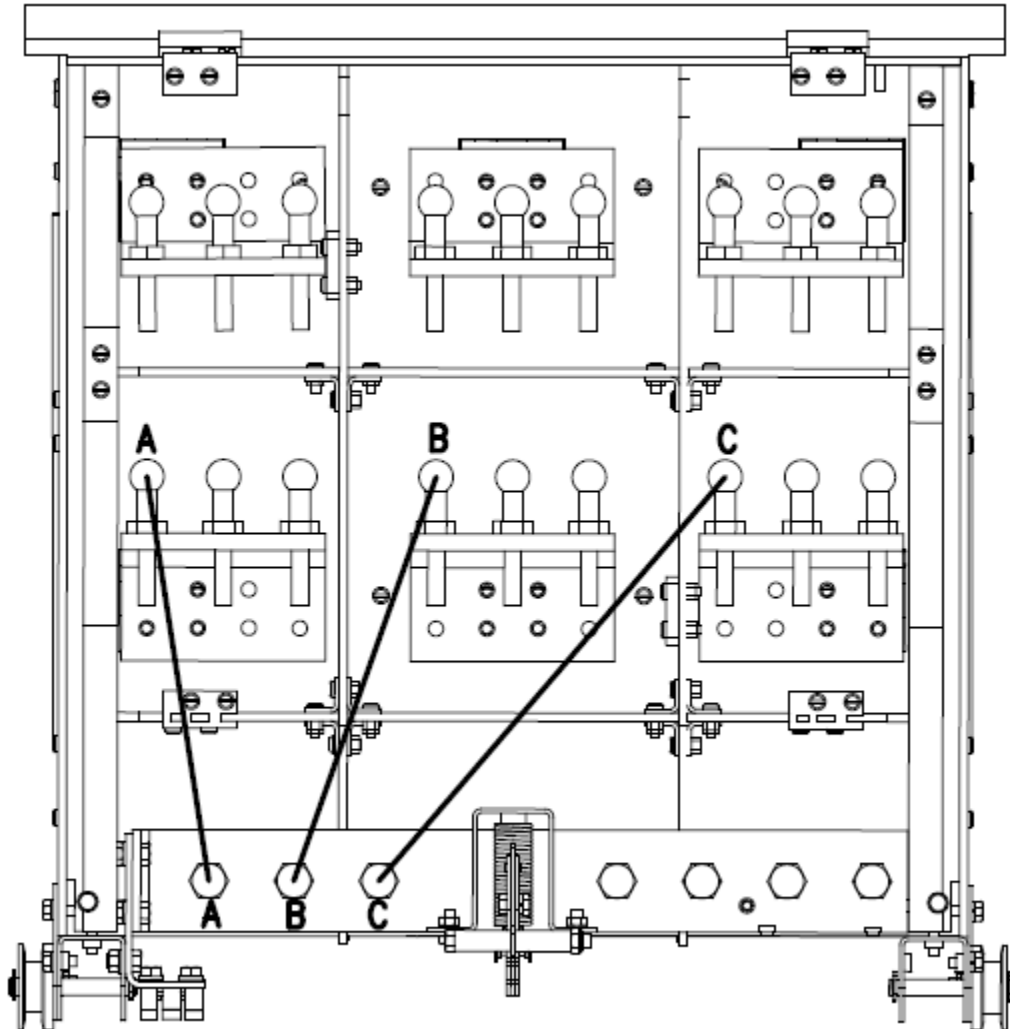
Typical mounting of a Single Cable Ground Set. Special cables are required for this type of connection (350 kcmil or 500 kcmil). The connection shown in this figure is for a bottom terminal connection. The same connection method should be used for a top connected system.
